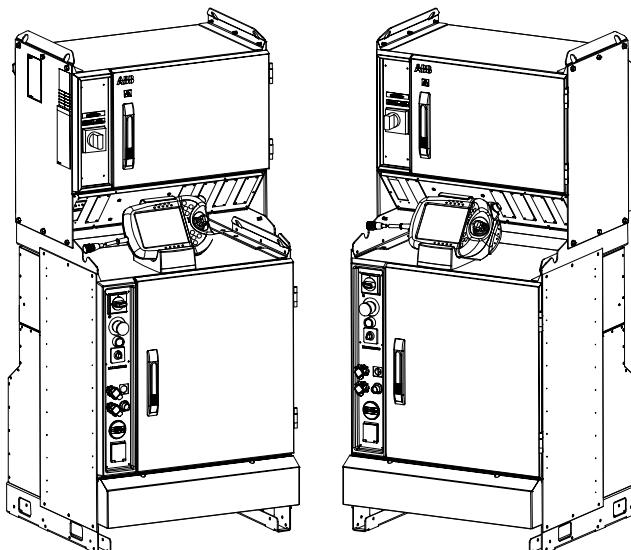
Spot Welding cabinet with robot controller cabinet.
